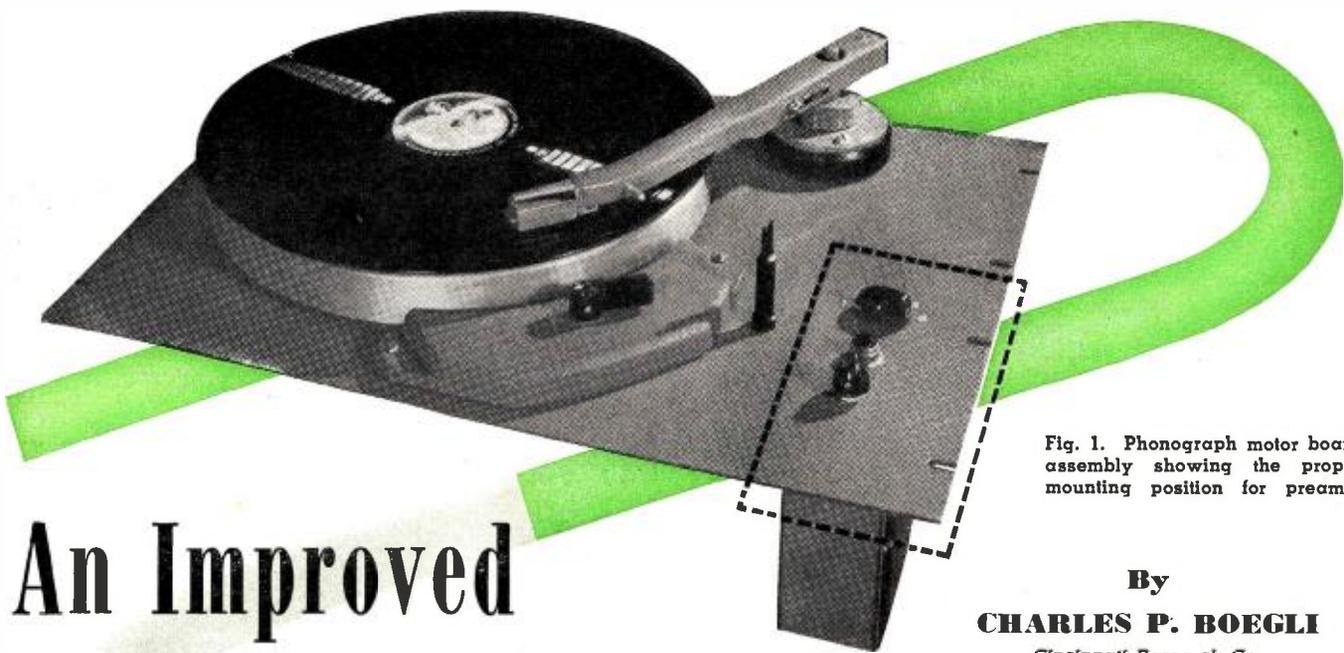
Phonograph motor board assembly showing the proper mounting position for preamp.
